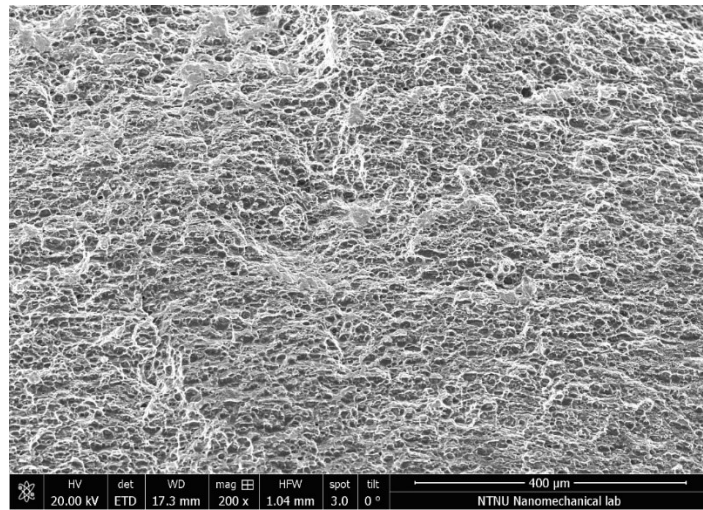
Additional SEM image of the fracture surfaces at low magnification for a selected fatigue test specimen. Specimen code: BMT26. Magnification 200x. Zone: final rupture.
